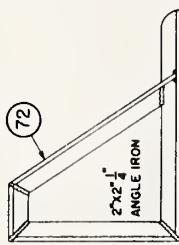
DETAIL OF FRAME TO REAR AXLE BLOCKING.
